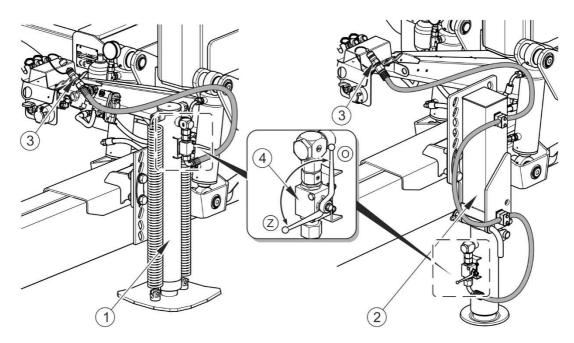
Connecting the hydraulic system of the hydraulic support
